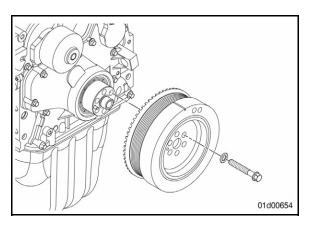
ALIGN THE CRANKSHAFT SPEED INDICATOR AND DAMPER WITH THE INDEX PIN
